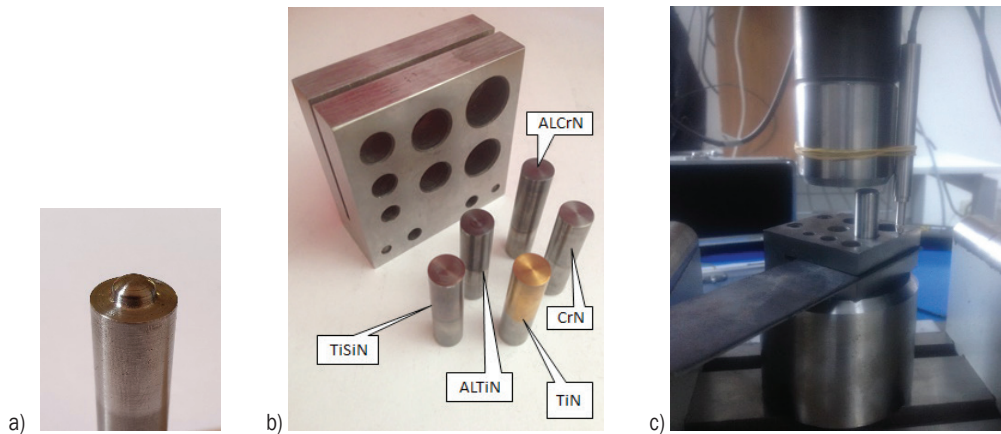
a) A punch having a hemispherical ball at the centre of its flat face, b) die set-up with coated tools, and c) experimental set-up for the blanking process
